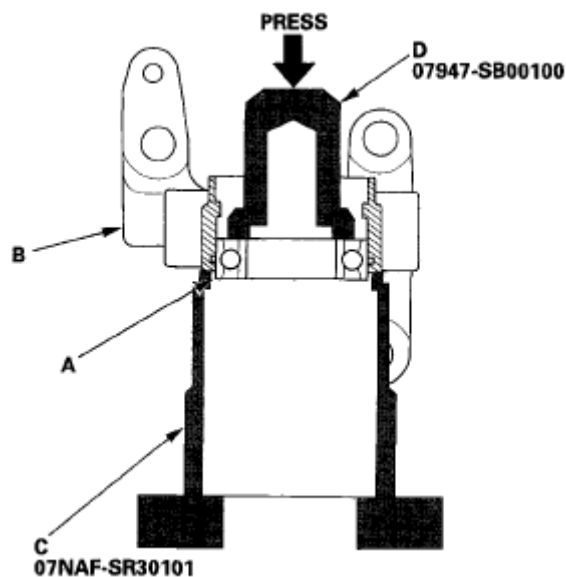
Pressing Intermediate Shaft Bearing Out Of Bearing Support
